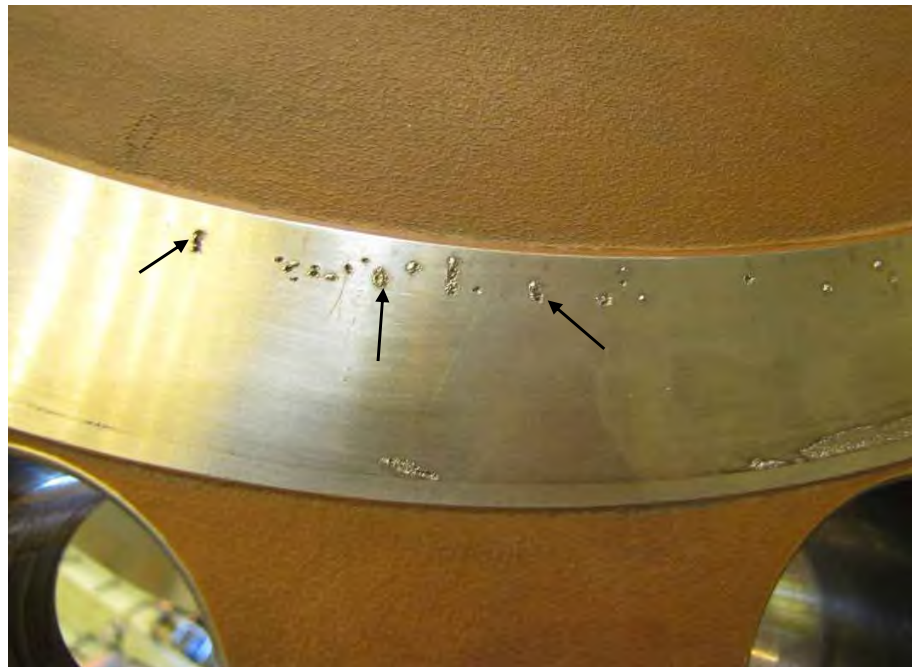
Close-up photograph of intermediate pressure turbine rotor turbine end coupling showing evidence of melting (arrows) on machined face.
